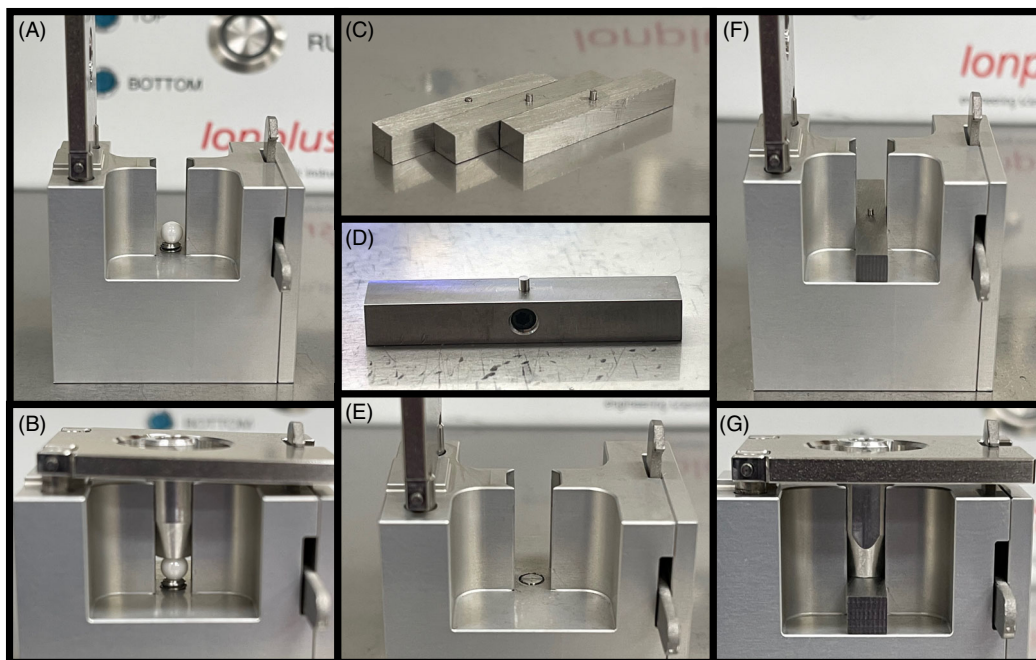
Target holder assembly of the Ionplus pneumatic sample press shown both without (A) and with (B) target. (C) Custom built inserts for producing targets with graphite surfaces recessed to the depths described in this study. The exposed section of the drill stems are 0.5, 1.0, and 1.5 mm in length. (D) 1 mm depth insert showing set screw for holding drill stem. (E-G) Modified target holder assembly shown with and without pressing pin and target.
